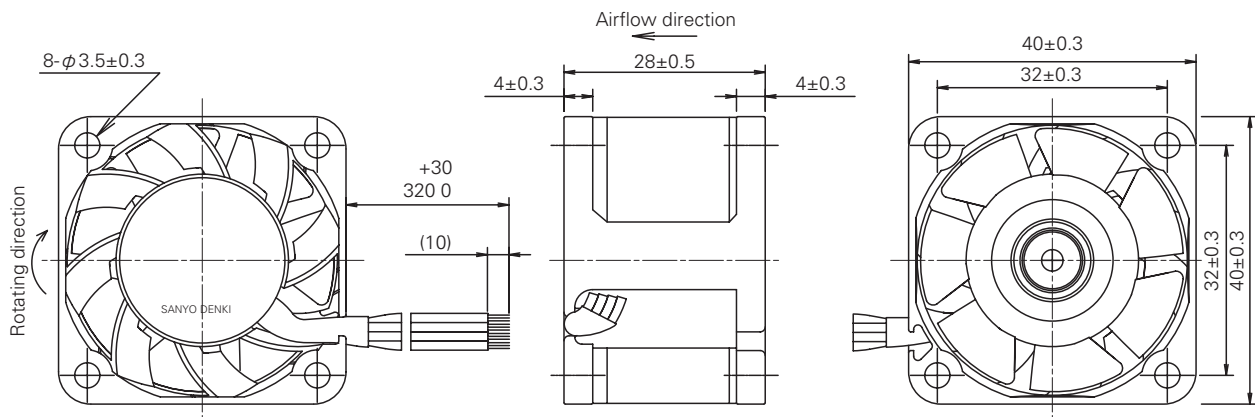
40 mm sq., 28 mm thick GE type dimensions (Units: mm)
